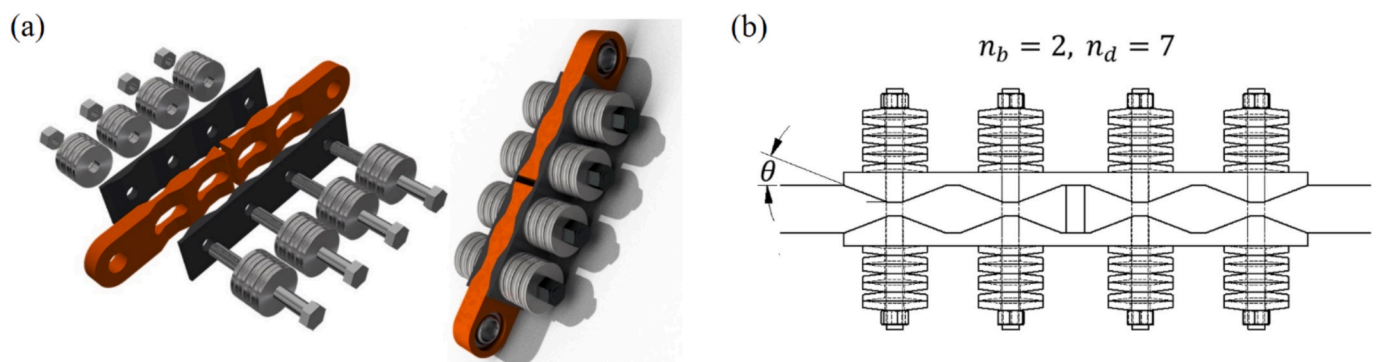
Illustrating the Resilient Slip-Friction Joint (RSFJ). (a) Assembled and exploded. (b) Cross-section.
